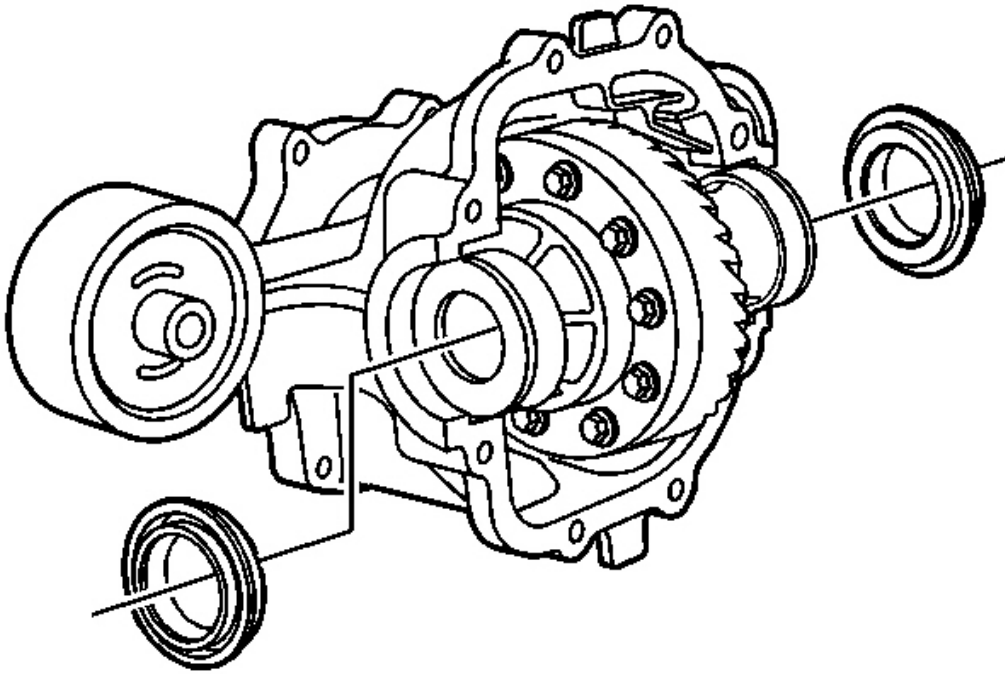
Removing Right & Left Axle Shaft Oil Seals
